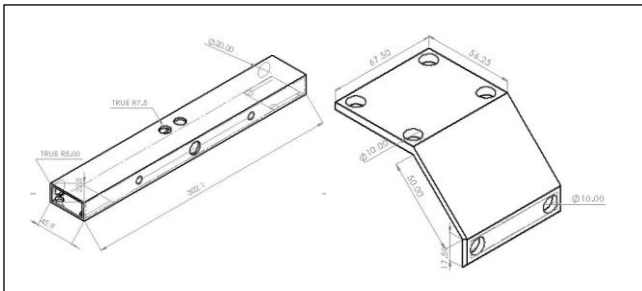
Sketches of the horizontal rod and the part joining rod and motor.
